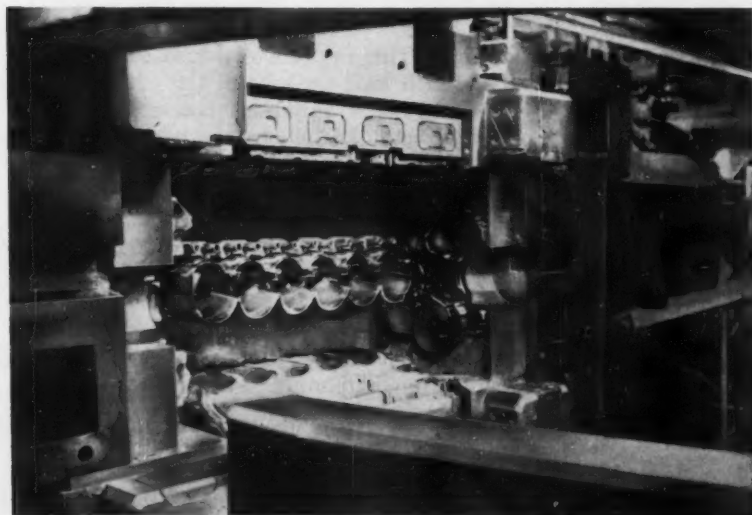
Movable or ejector half of the die forms the engine block sides and the cored-out top surface. Side-forming die sections are mounted on slides.
